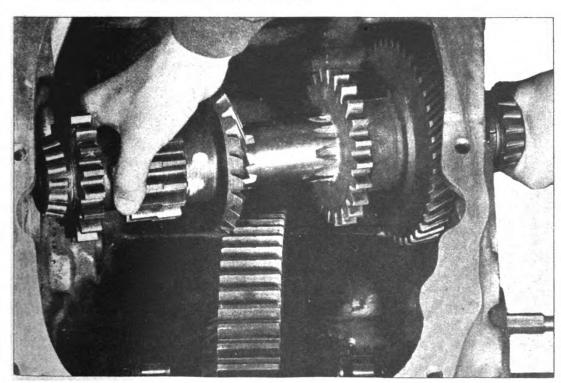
Removing First Reduction Shaft Complete with Gears and Bearings
